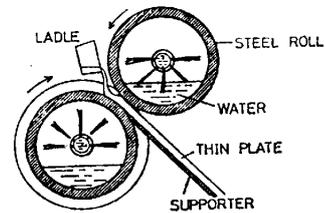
Schematic diagram of the direct-rolling casting machine.
